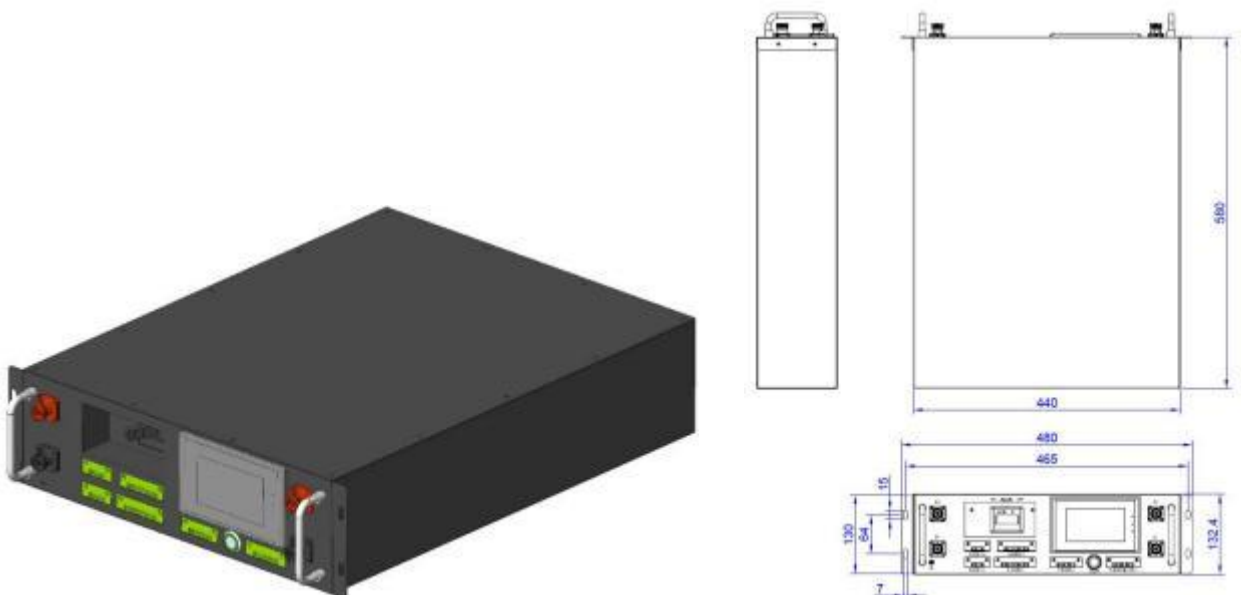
1 - 1 Appearance and dimensional drawing of high voltage box
